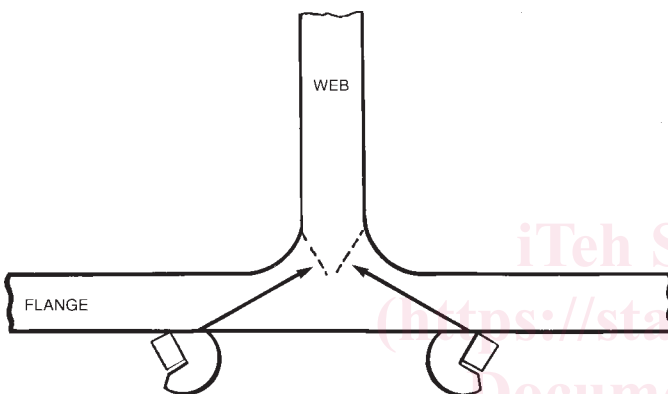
Technique 8, for Inspecting the Weld Volume of Double-Vee Corner Welds
